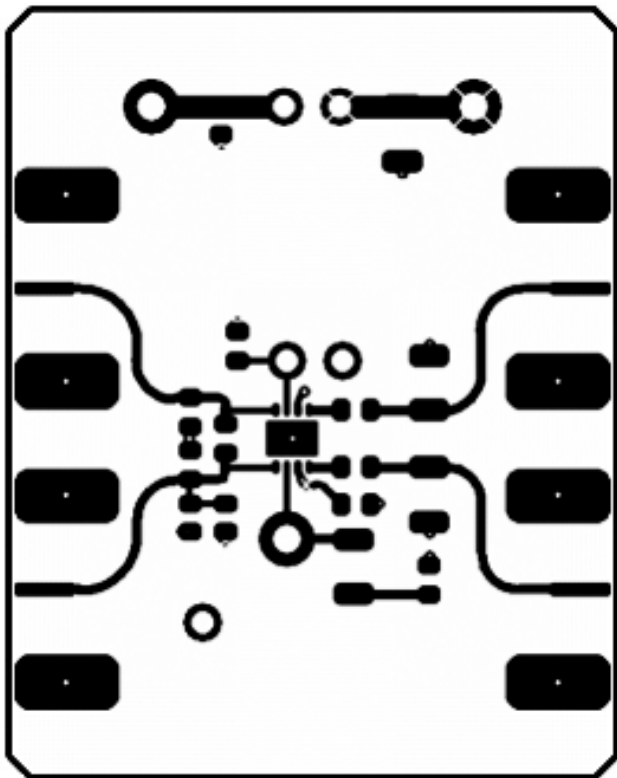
ADA4433-1BCP-EBZ Board Layout Pattern, Primary Side
